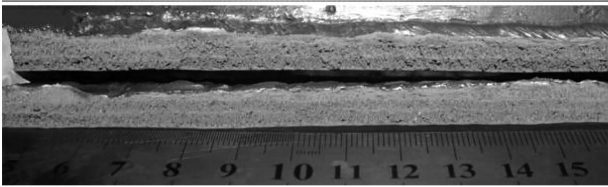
Macro picture of T-joint at vertical welding position at 11m water depth
